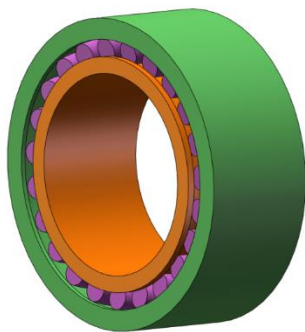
Three-dimensional CAD model of the continuous casting roller
